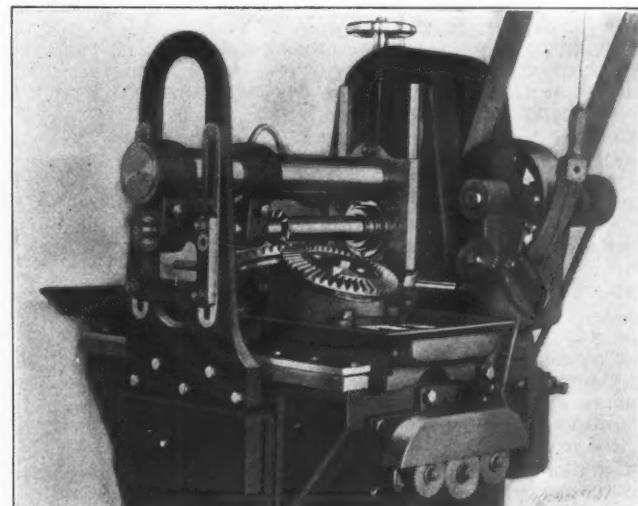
Special Tandem Fixture for Cutting Bevel Gears in Automatic Index Milling Machine
